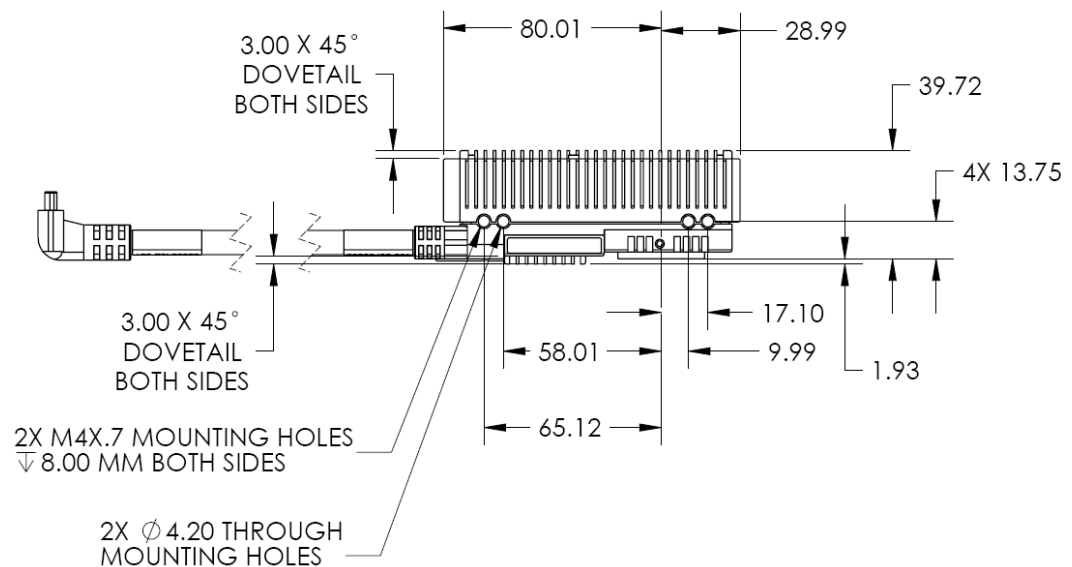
HG-CH Camera Head dimensions and mounting holes, side (in mm)
